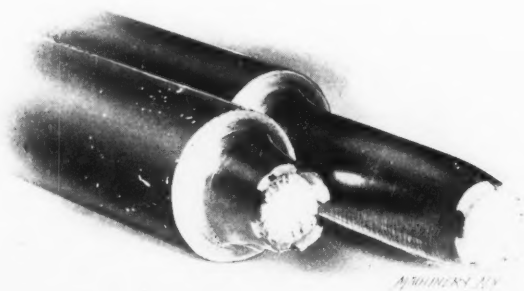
Test Bar, 1-2 inch Diameter Vanadium Axle Steel. Star Fracture.
